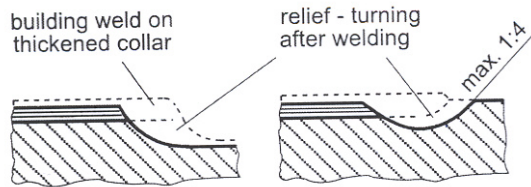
Build-up welds applied to rudderstocks and pintles
